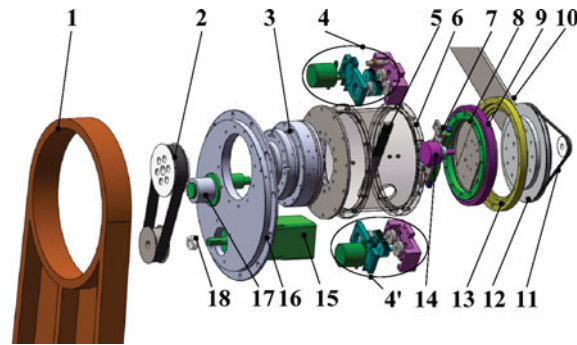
Exploded view of vsaFGR. 1- Base, 2- Timing belt for driving, 3- Harmonic gear drive, 4- Stiffness regulating mechanism (Details are shown in Fig. 5), 5- Flexible gear rack, 6- Hollow output-shaft, 7- Guide and slider, 8- Inner bushing for bearing, 9- Crossing roller bearing, 10- Output-link, 11- Timing belt for measuring, 12- Output-flange, 13- Outer bushing for bearing, 14- Resistance potentiometer, 15- Joint motor, 16- Mounting flange, 17- Tension wheel, 18- Spacer.
